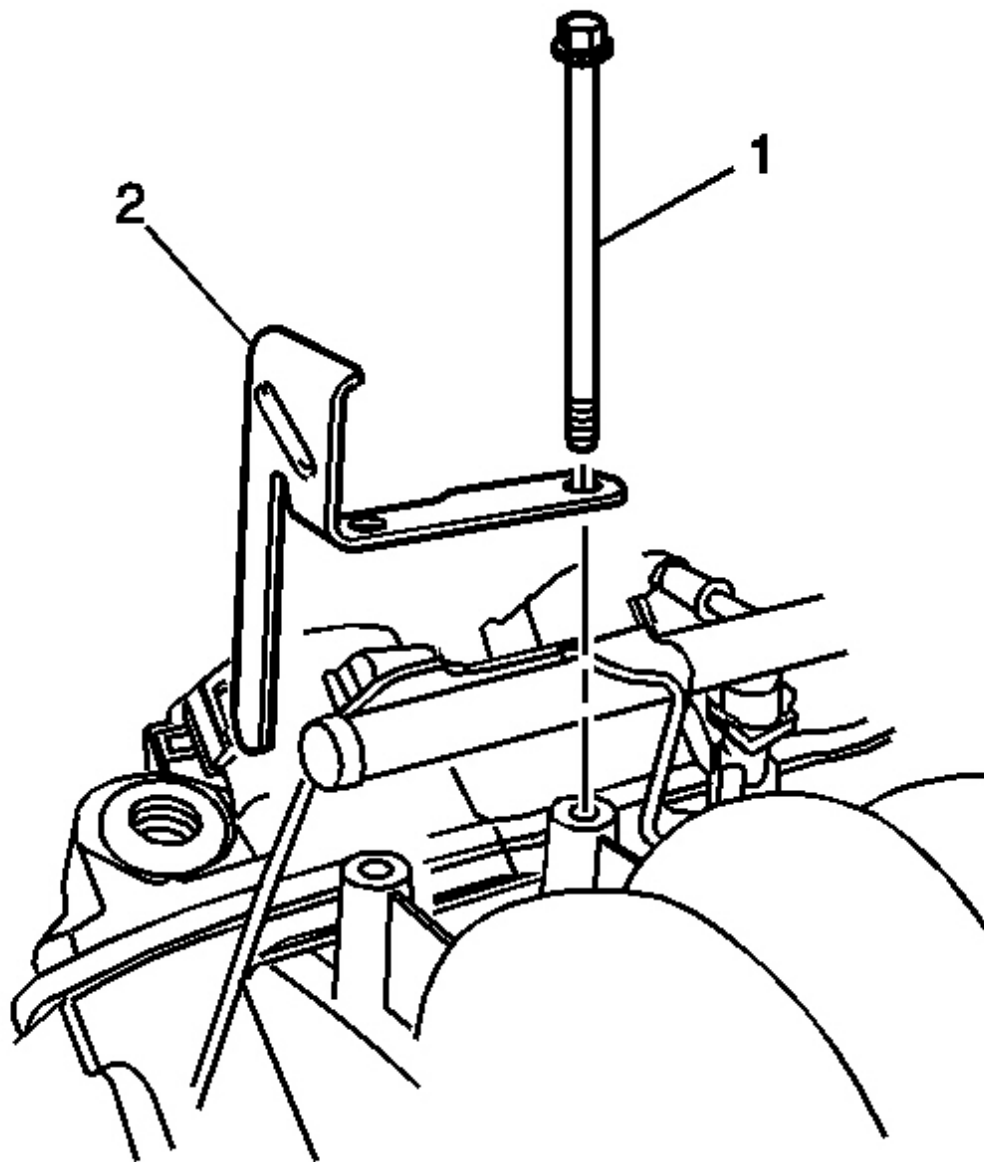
Intake Manifold Bolts & Fuel Rail Stop Bracket
